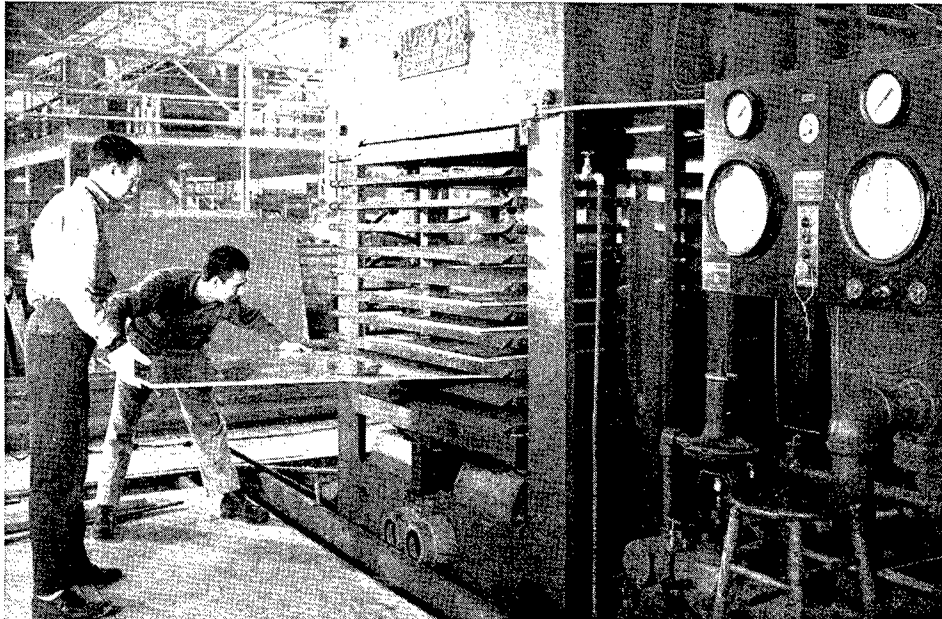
Multiple-opening hydraulic press being loaded with flat sandwich parts.
